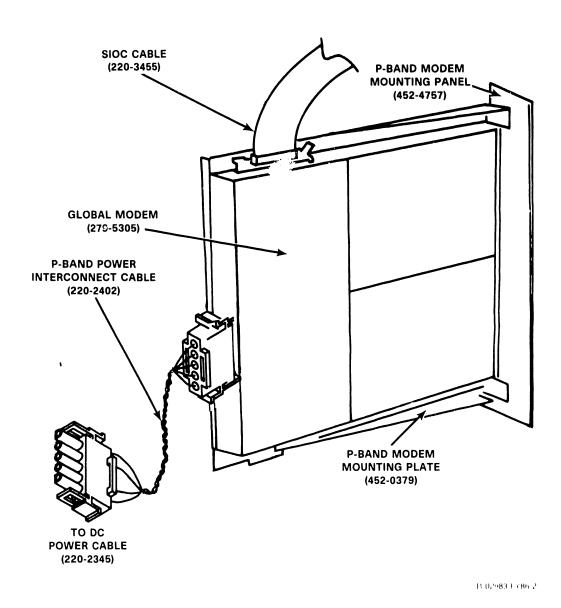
VS-300 Global Modem Assembly 270-1020
